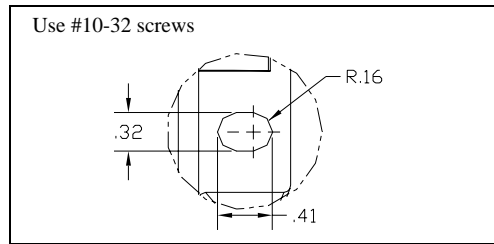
Idea Relay, Mounting Hole Detail (inches)
